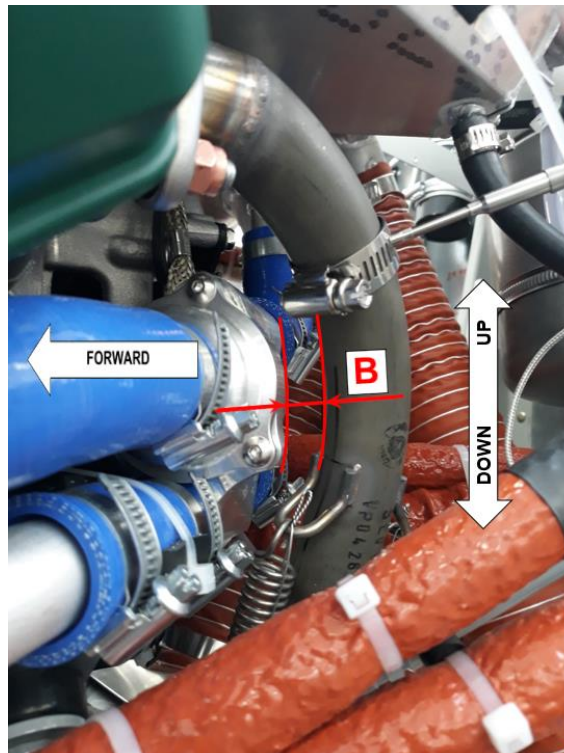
Distance between cooling tube and engine mount – left side – bottom view
